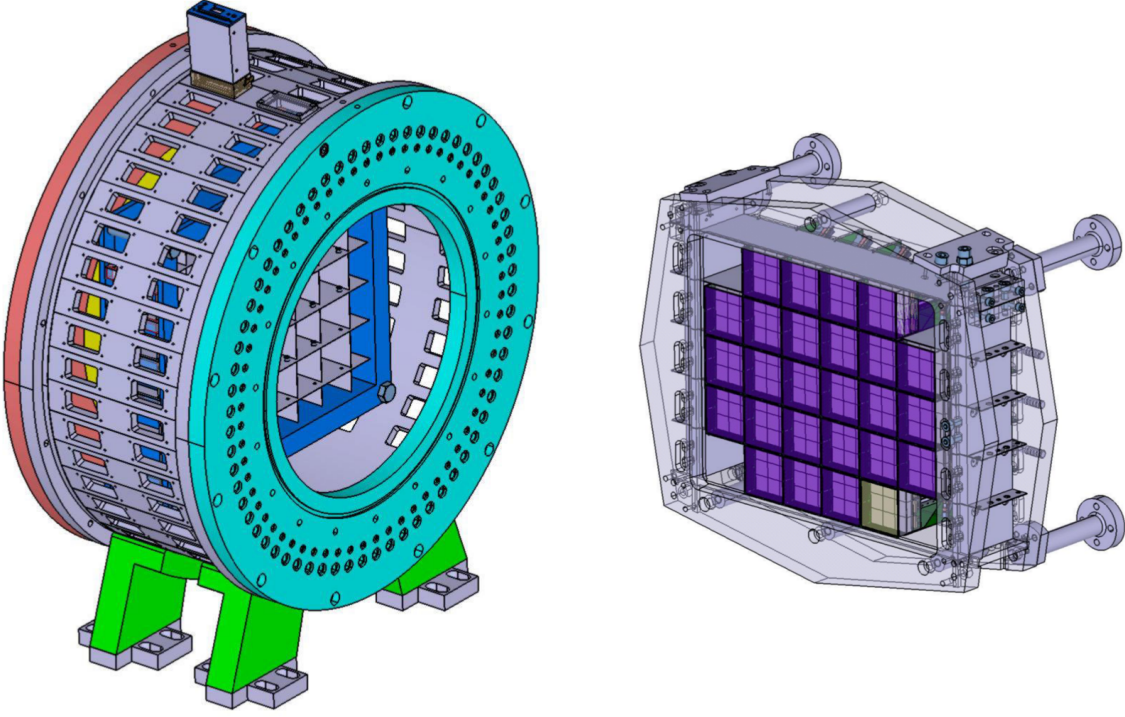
Technical drawing of LYCCA chamber. Left: front view of LYCCA chamber with holding structure inside. Right: front view of holding structure equipped with detectors. Taken from [85].
